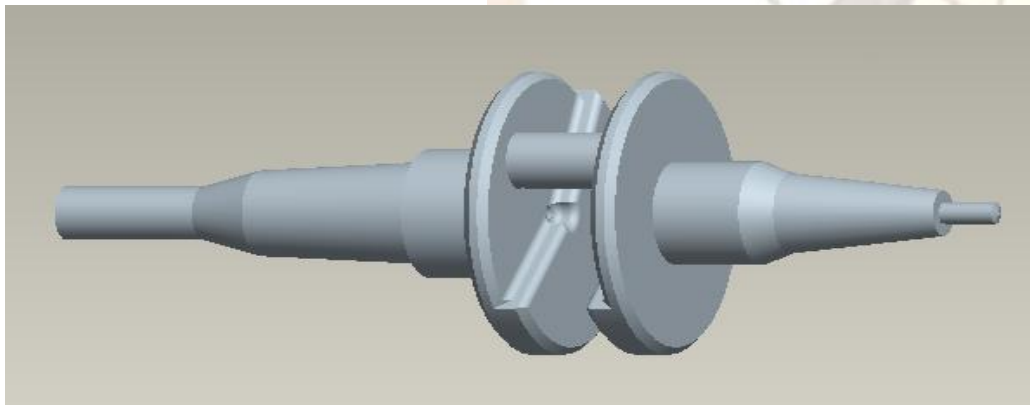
, Geometric model of single cylinder SI engine Crankshaft
